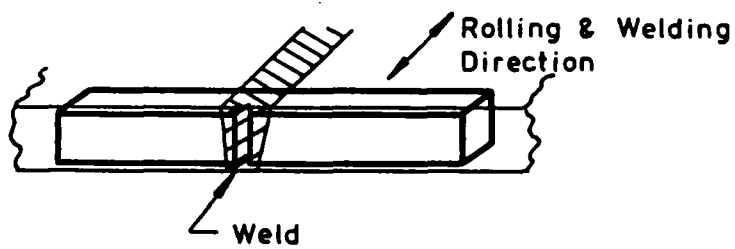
SEN CANTILEVER BEAM SPECIMEN
